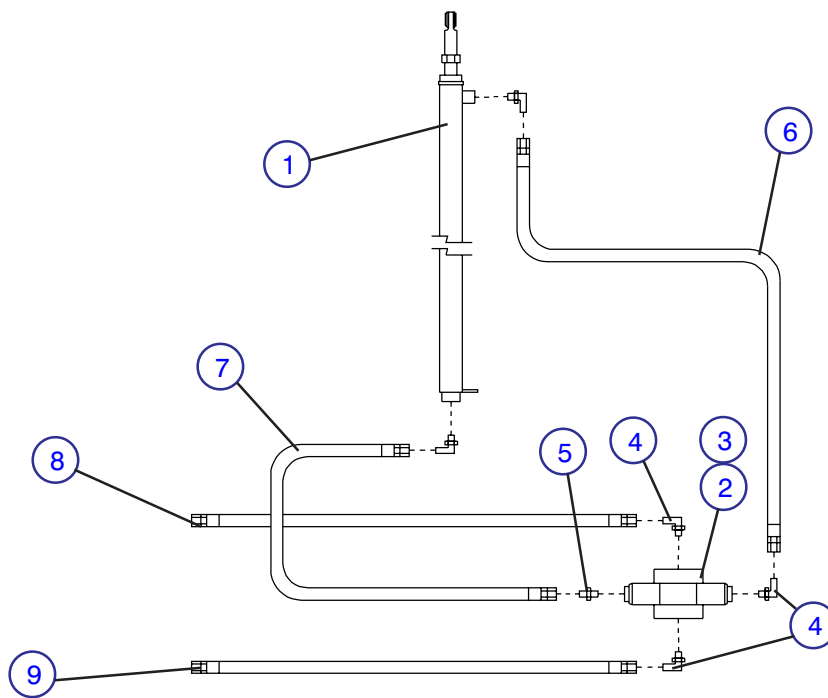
POWERED EXTENSION PLATFORM CYLINDER ASSEMBLY
